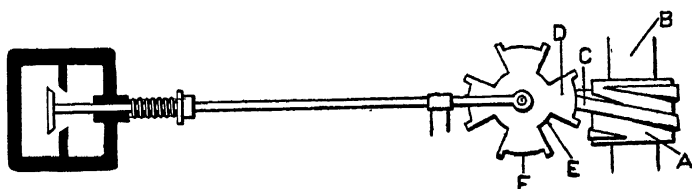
VALVES OPERATED BY WORM WHEEL CAM.
